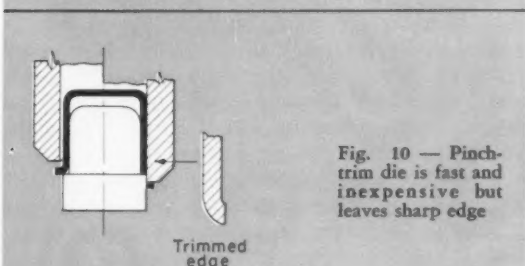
Pinch-trim die is fast and inexpensive but leaves sharp edge
